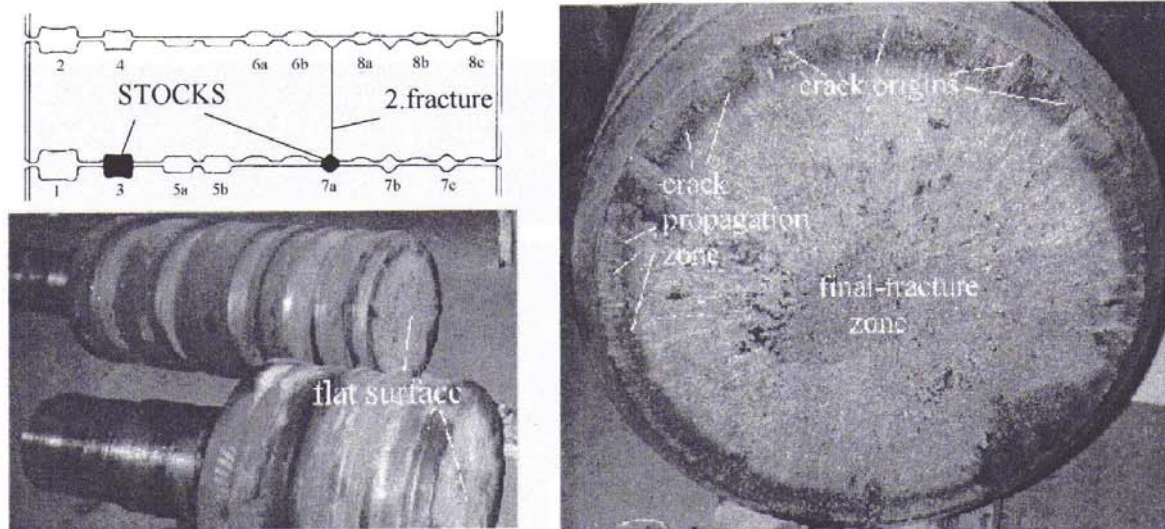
Fracture surfaces of the 2nd broken roll and the position of the stocks in time of the fracture.
